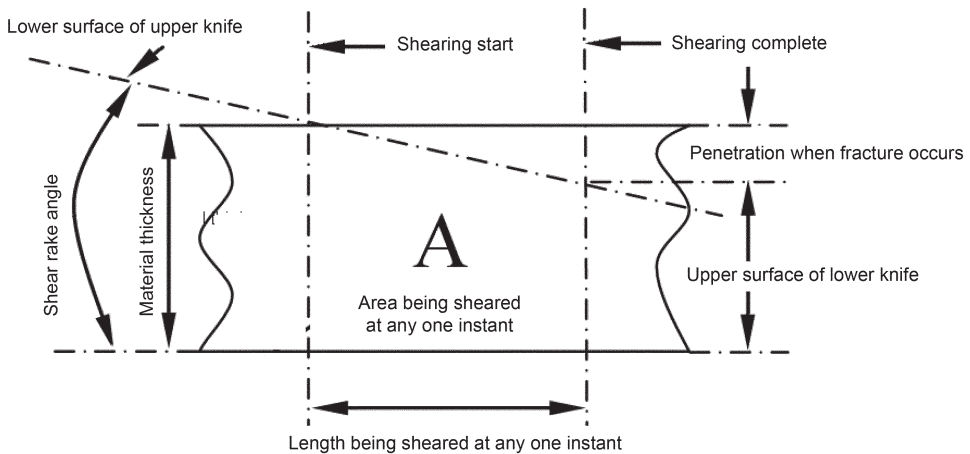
Penetration during shearing. Adapted from Ref 1.21
